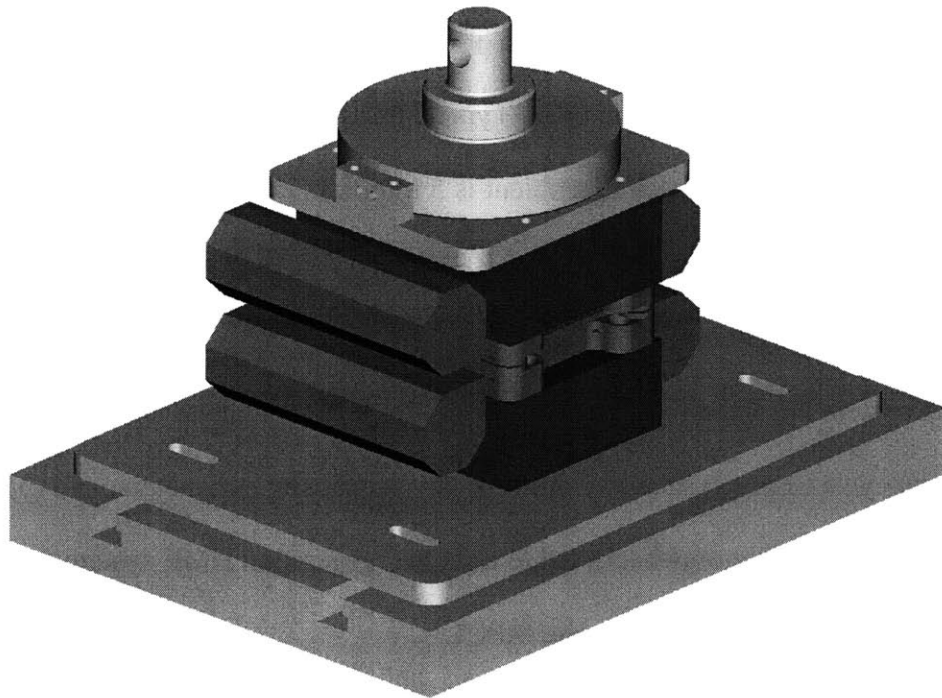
Three-dimensional view of the full platen assembly [29]
